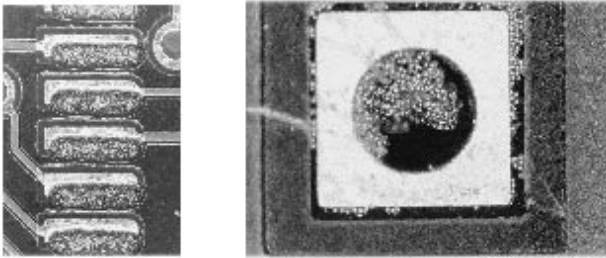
Left: Misprinted PCB, Right: Via filled with solder paste.
